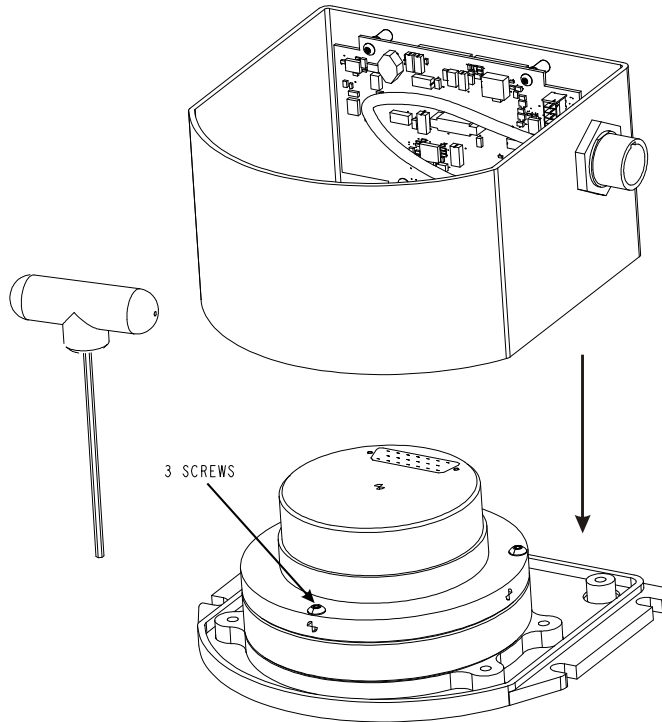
Lift Top Cover, Tube Body and 3 Ring Spacer Screws
